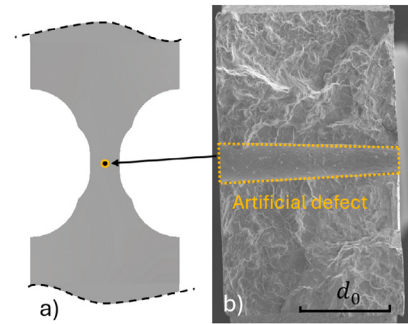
(a) Schematic representation of the positioning of artificial defects in the gauge section of flat specimens. (b) SEM image of the fracture surface of a flat specimen with an artificial defect introduced by water jet cutting.
